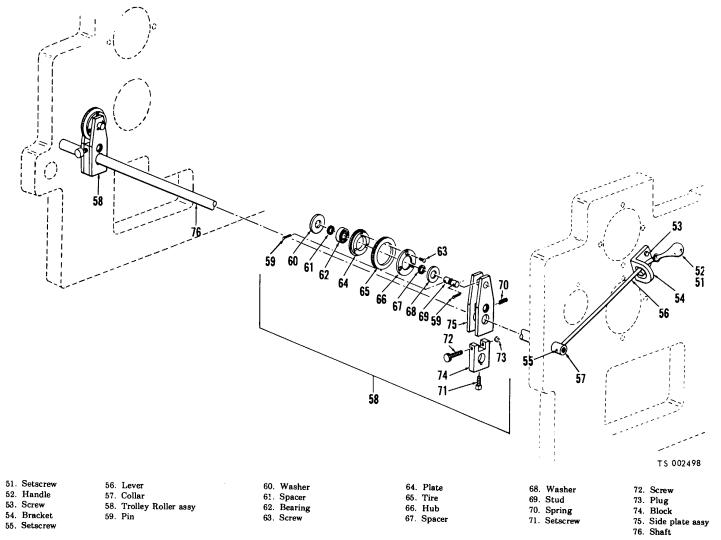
Trolley, paper guide and nipping roller alignment assembly (Sheet 2 of 7). 4-95
